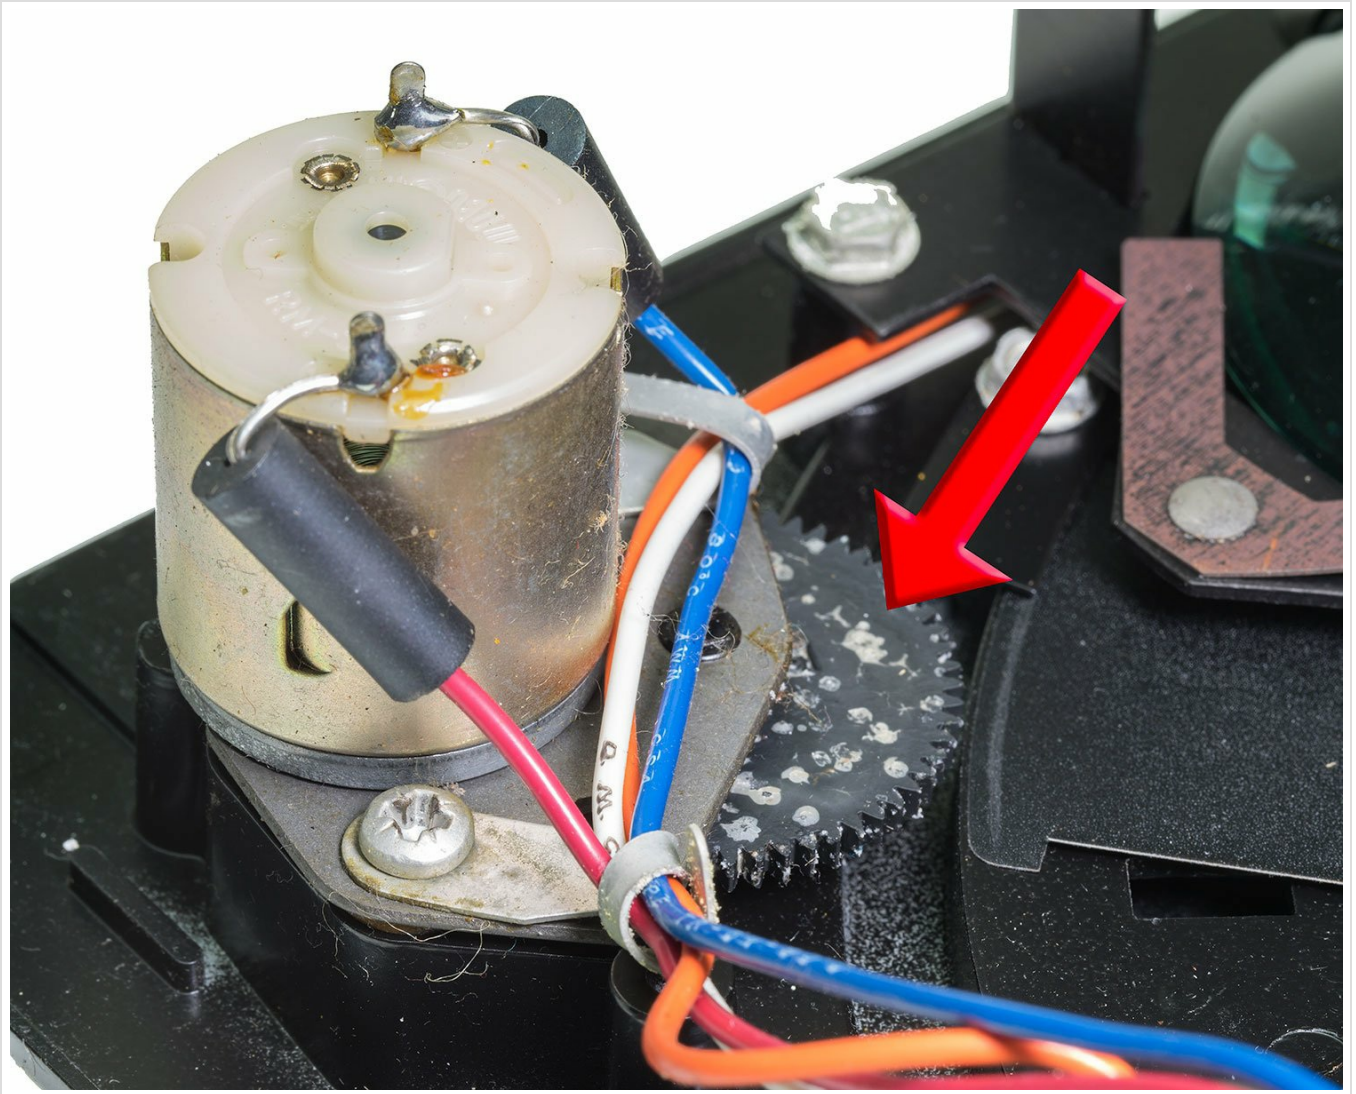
The new CUBE-GEAR correctly installed within the Bell & Howell Cube Slide Projector's mechanism. The red arrow indicates the position of the newly installed gear, ready to restore functionality.
